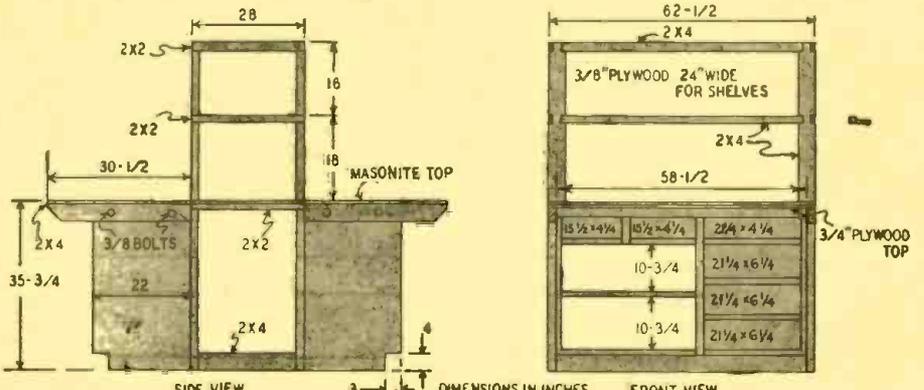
The "kitchen cabinet" workbench, front and side views. Smaller areas on front view are drawers. Larger ones may be open shelves or be fitted with doors and back as closets.
